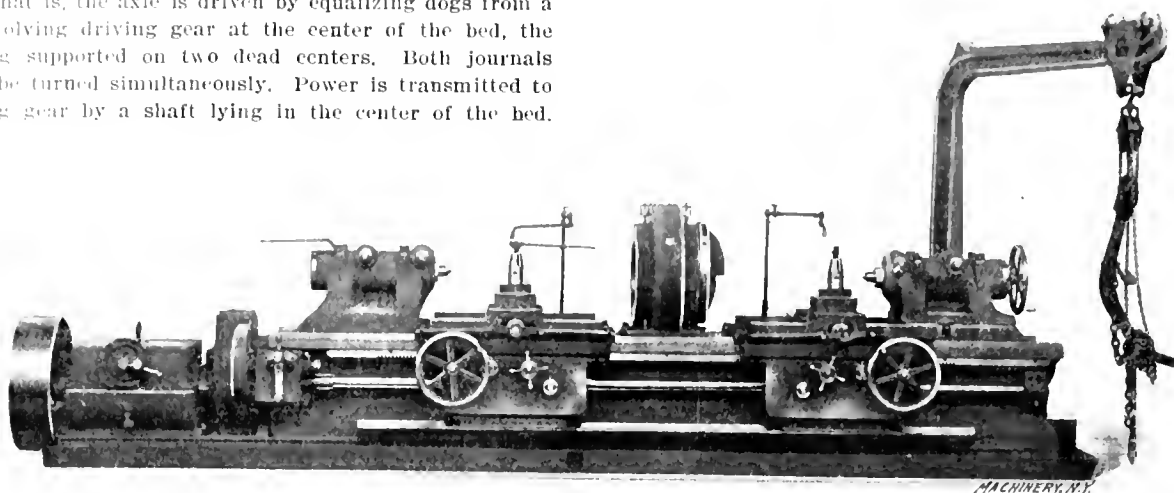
Lodge & Shipley Single Pulley Drive Axle Lathe.
